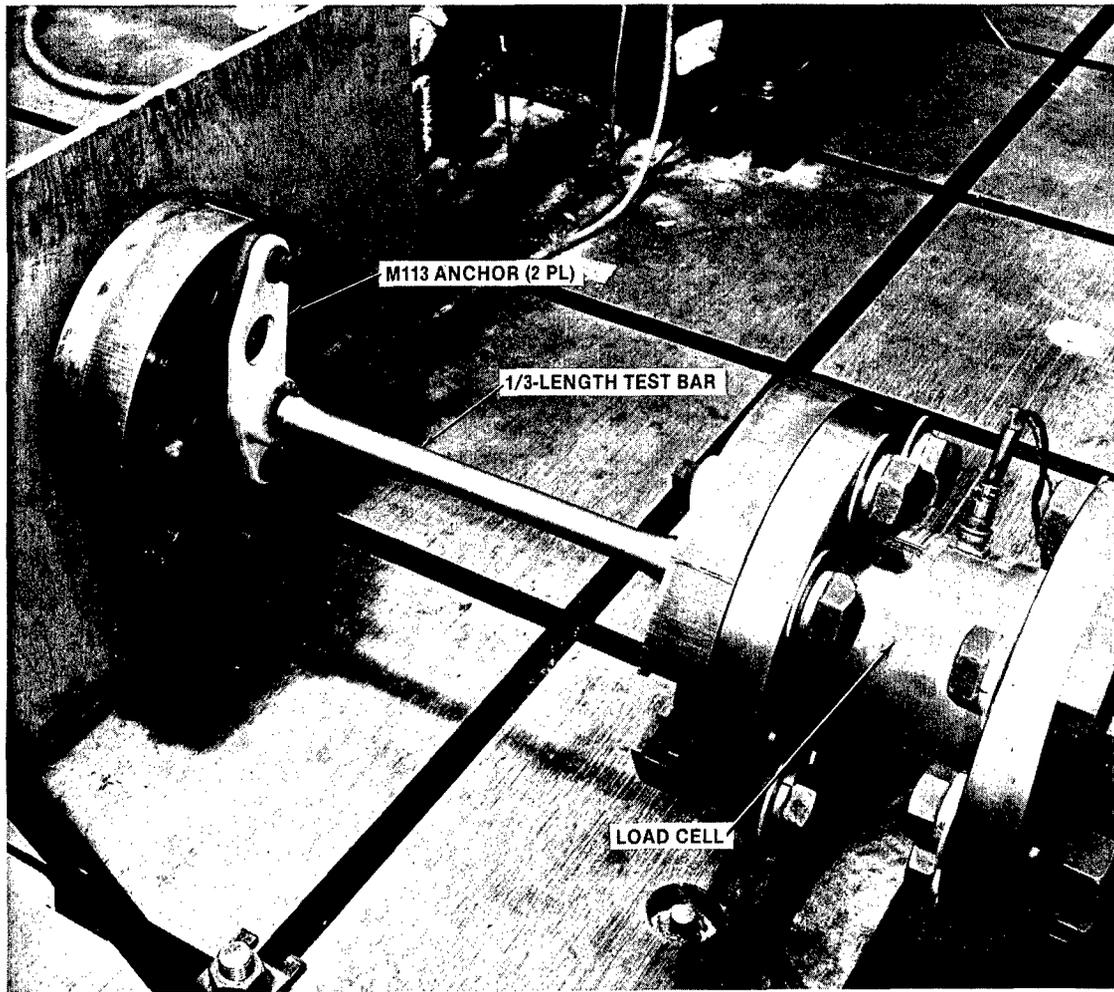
Torsion Bar Endurance Test Fixture Shown with Scatter Shield Removed
